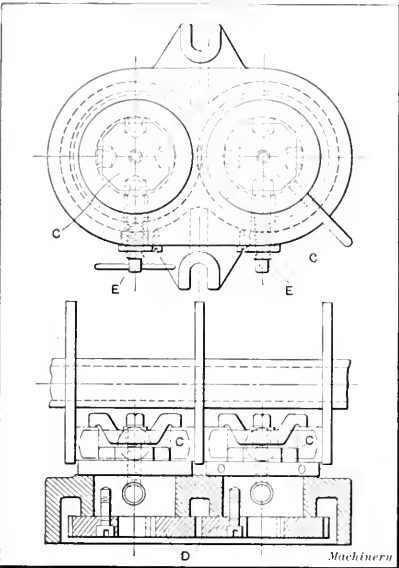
Duplex Fixture for use in milling the Outside Faces of the Forgings
